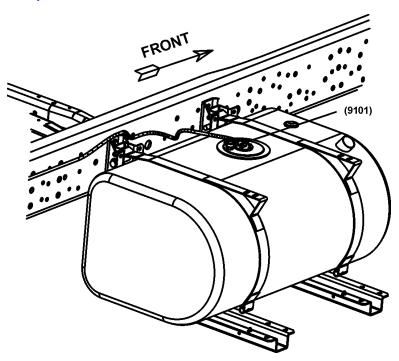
Fuel Sensor Connector Locations (Right Side Mount Fuel Tank Shown)
